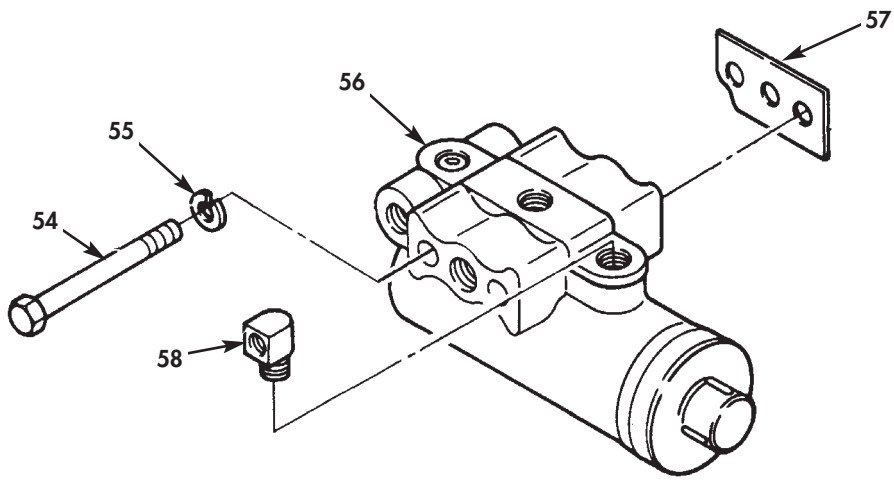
Air Compressor and Governor Assembly (Sheet 2 of 2).
